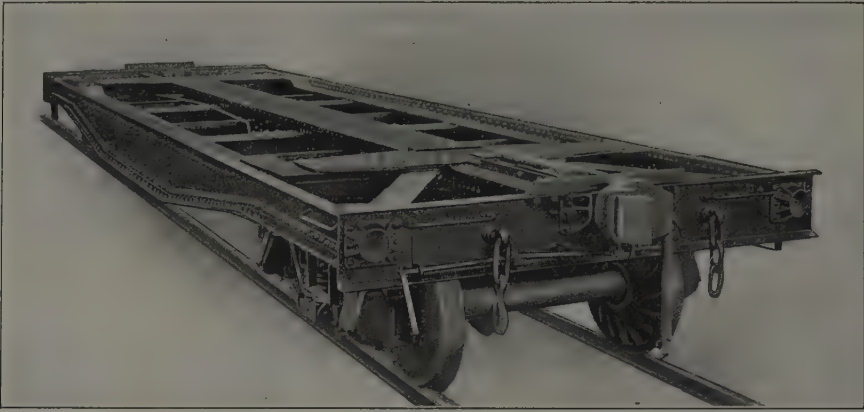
Steel Frame for Erie Railroad 75-Ton Capacity Flat Car. Builder, American Car & Foundry Company.
